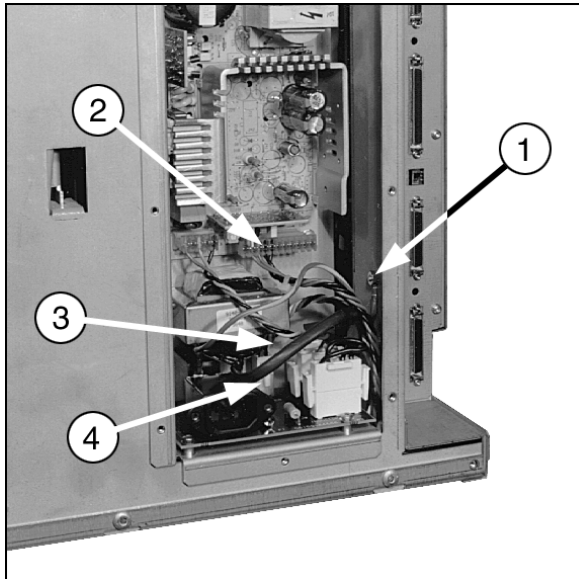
Disconnecting Cables Before Removing 24 V Module
